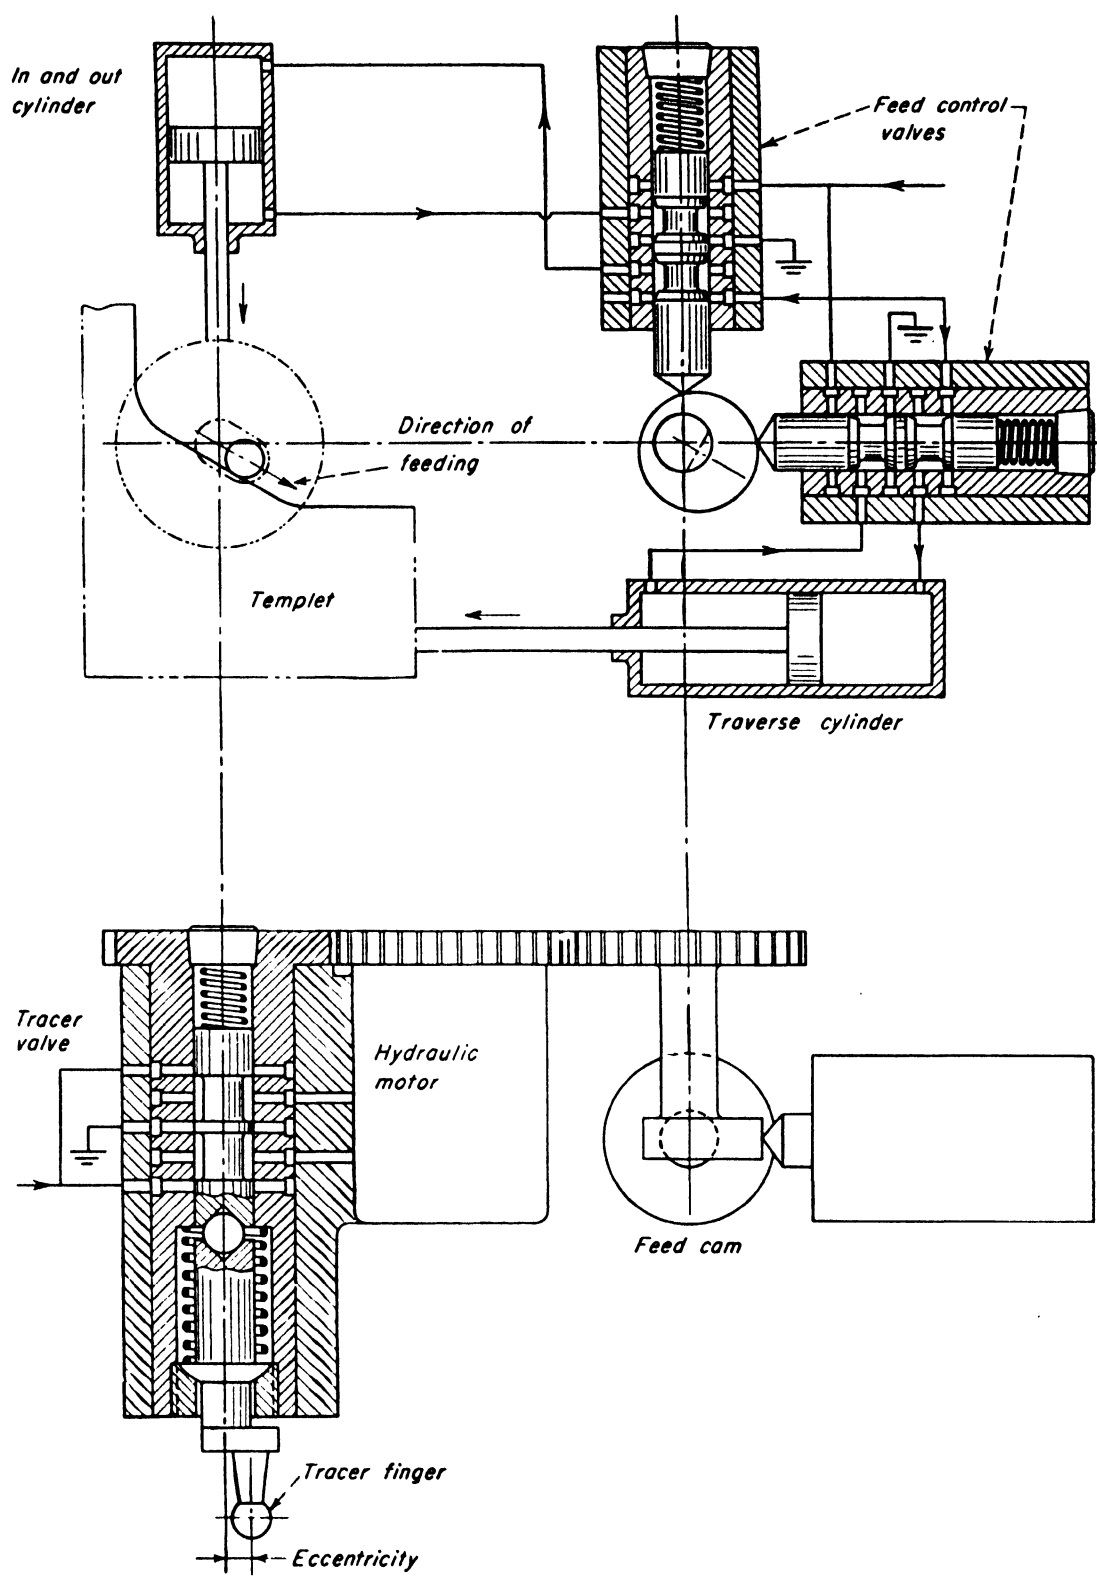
360° tracer. (Cincinnati Milling Machine Co., Cincinnati, Ohio.)
